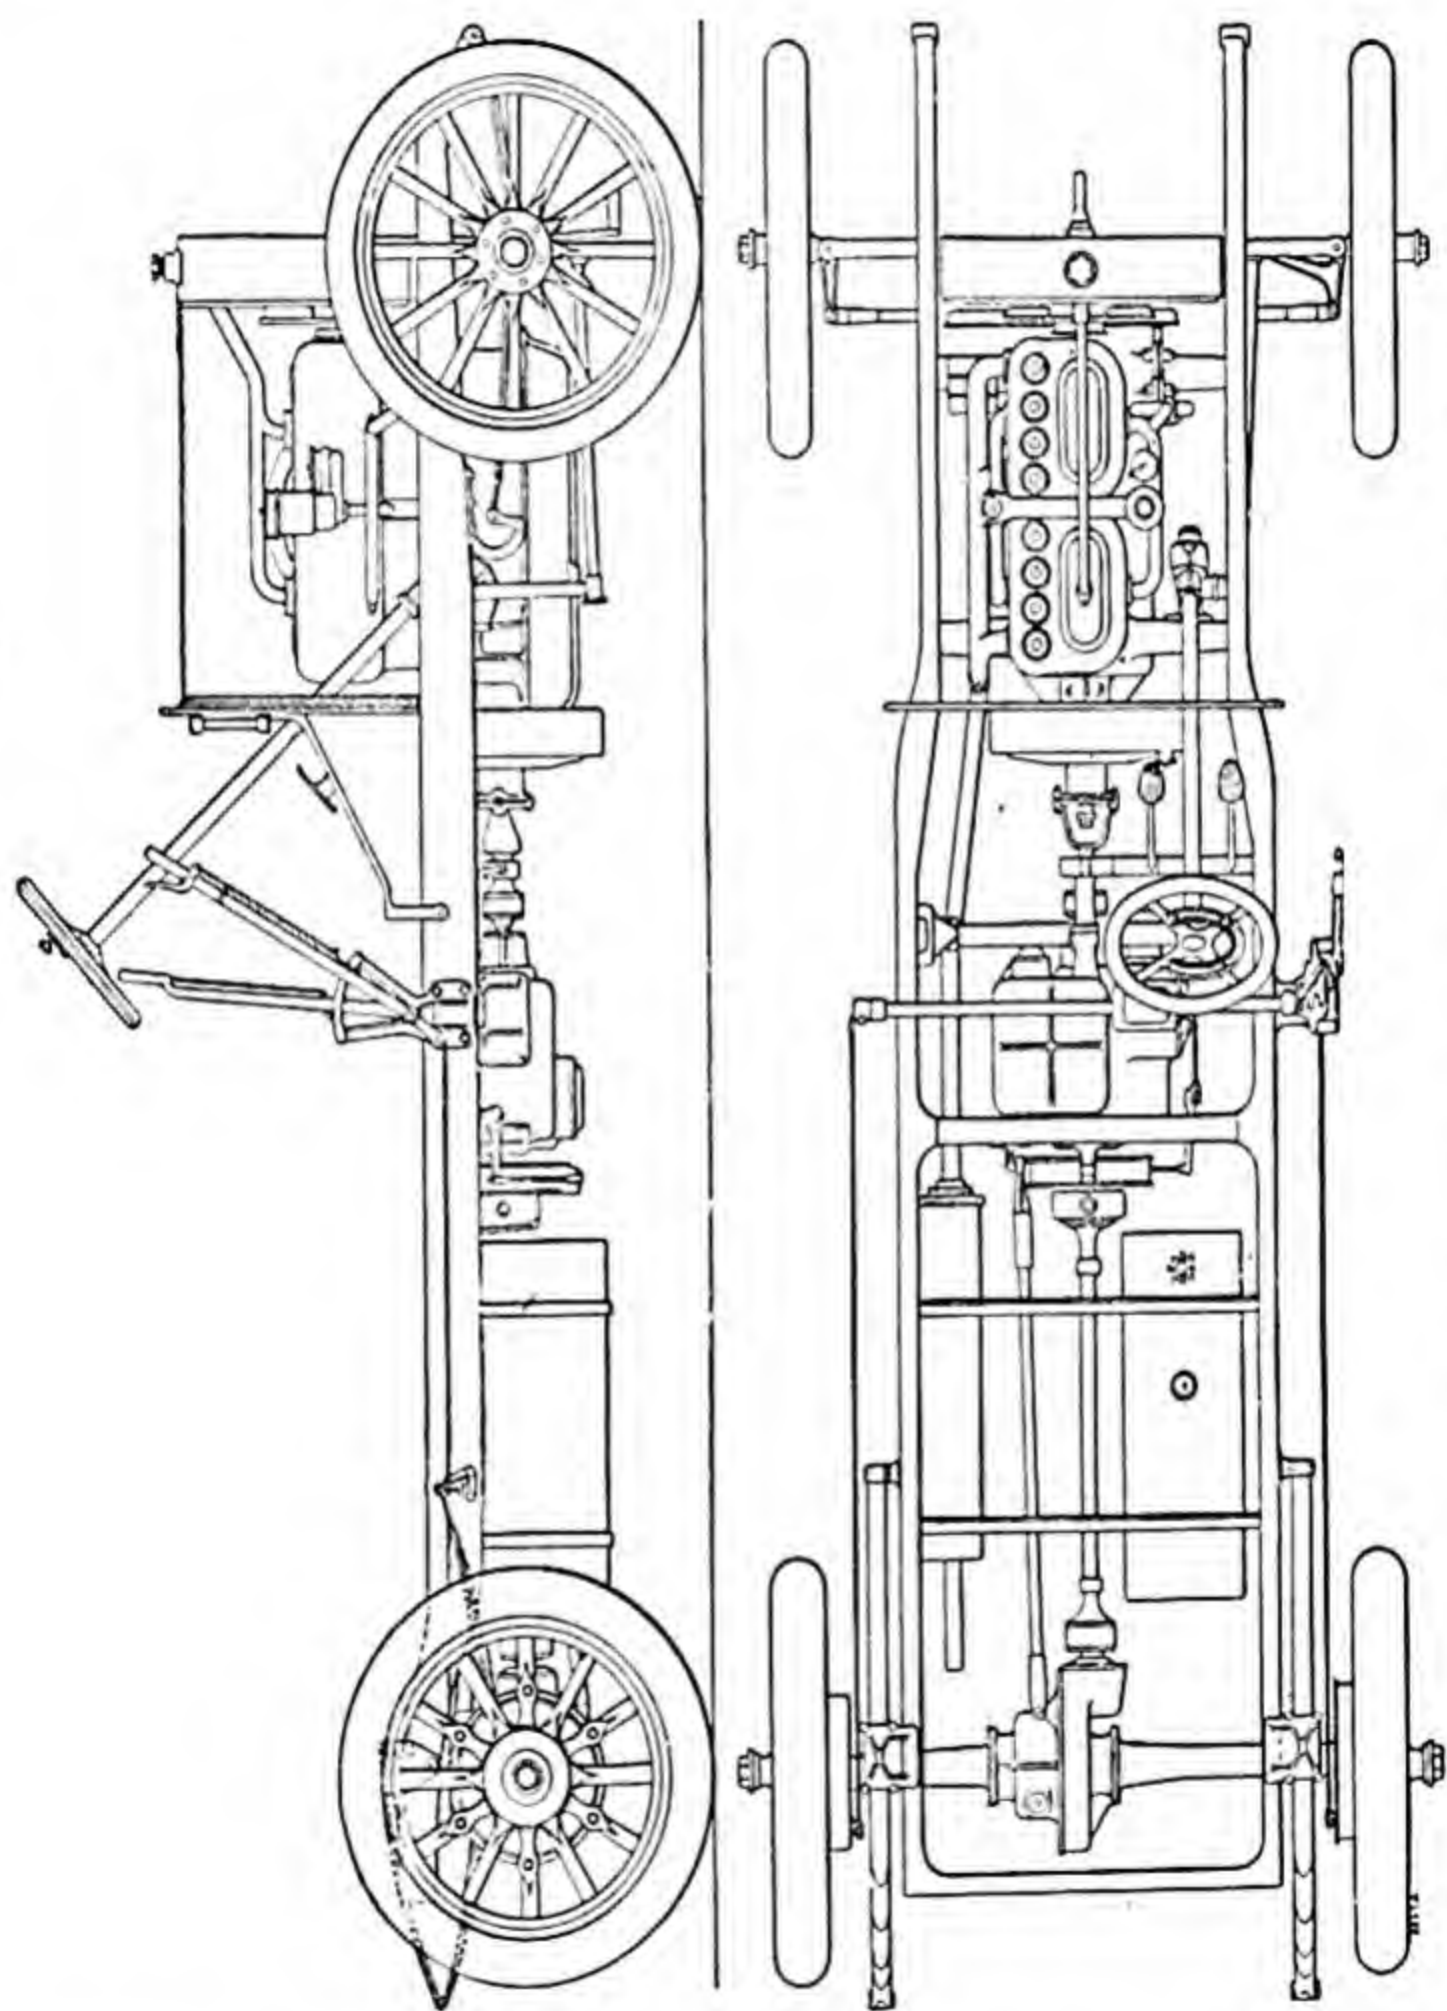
Elevation and plan of the chassis for a 30 H.P. Siddeley motor car.
